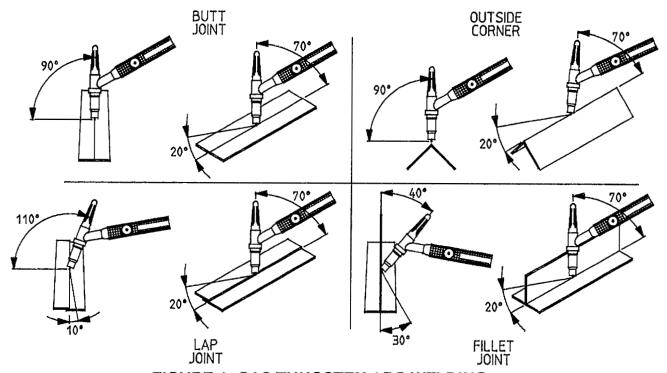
GAS TUNGSTEN ARC WELDING.
